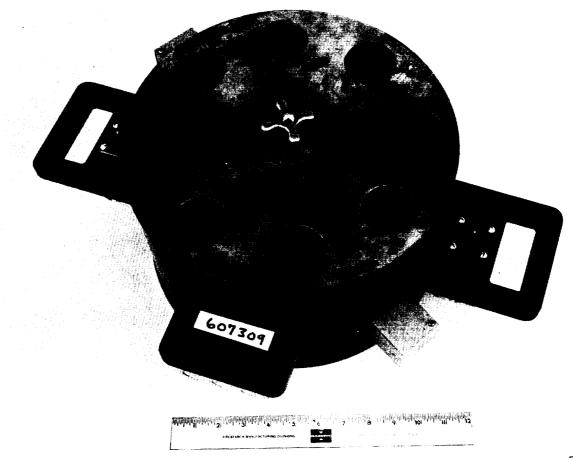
Assembly Task Weld Fixture (Tool No. T-607309)
